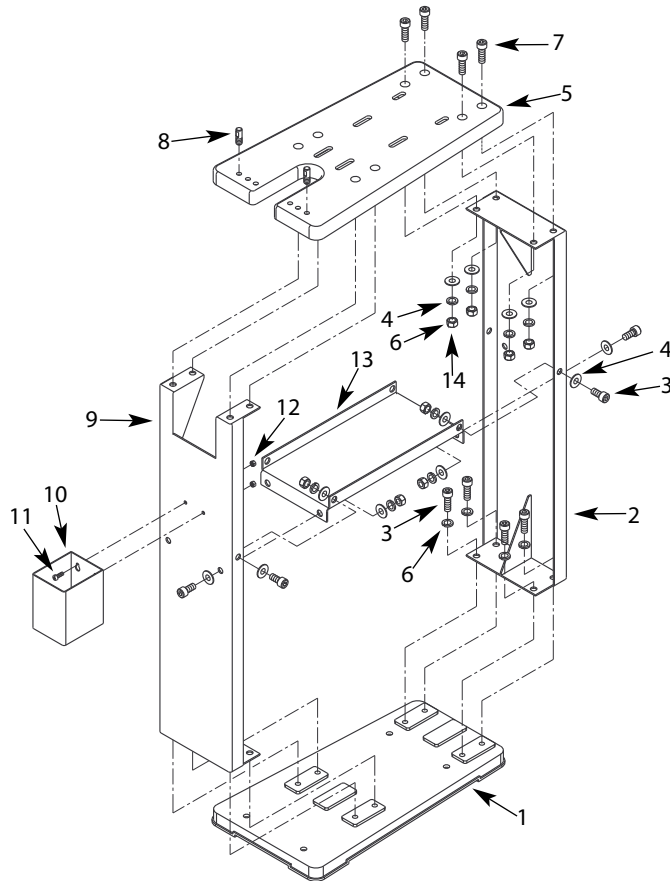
Replacement Parts Illustration for Arbor Press Stand
